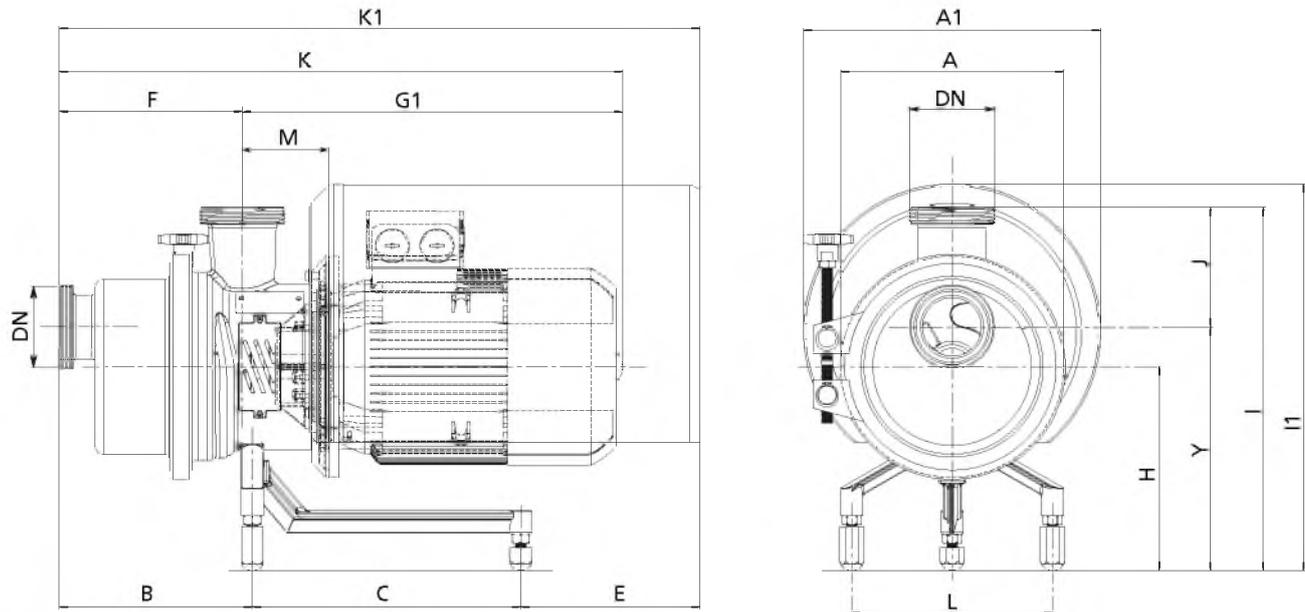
Pump set with motor shroud, with 3-point ball feet
